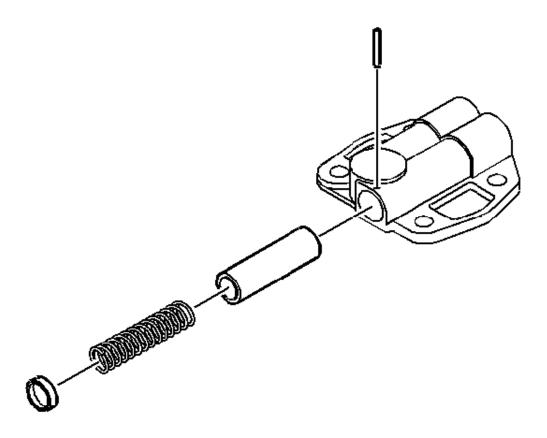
View Of Pressure Regulator Valve & Spring Courtesy of GENERAL MOTORS CORP.
